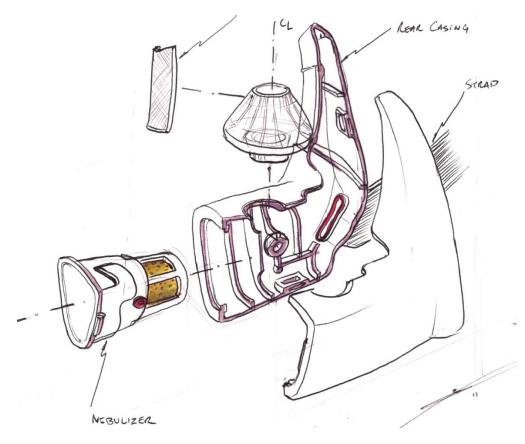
Quick sketch to resolve technical layout/product assembly (image source: Swinburne final year Product Design Engineering student)
